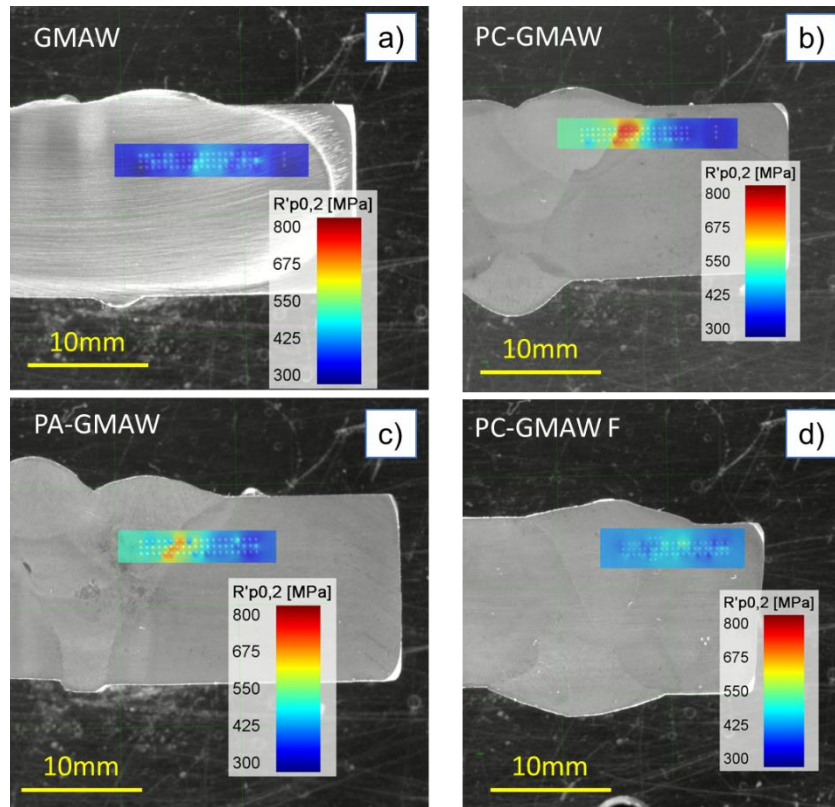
The YS maps for welded joints of S460M steel made by different welding modes : GMAW (a), PC-GMAW (b), PA-GMAW (c), PC-GMAW -F (d).
